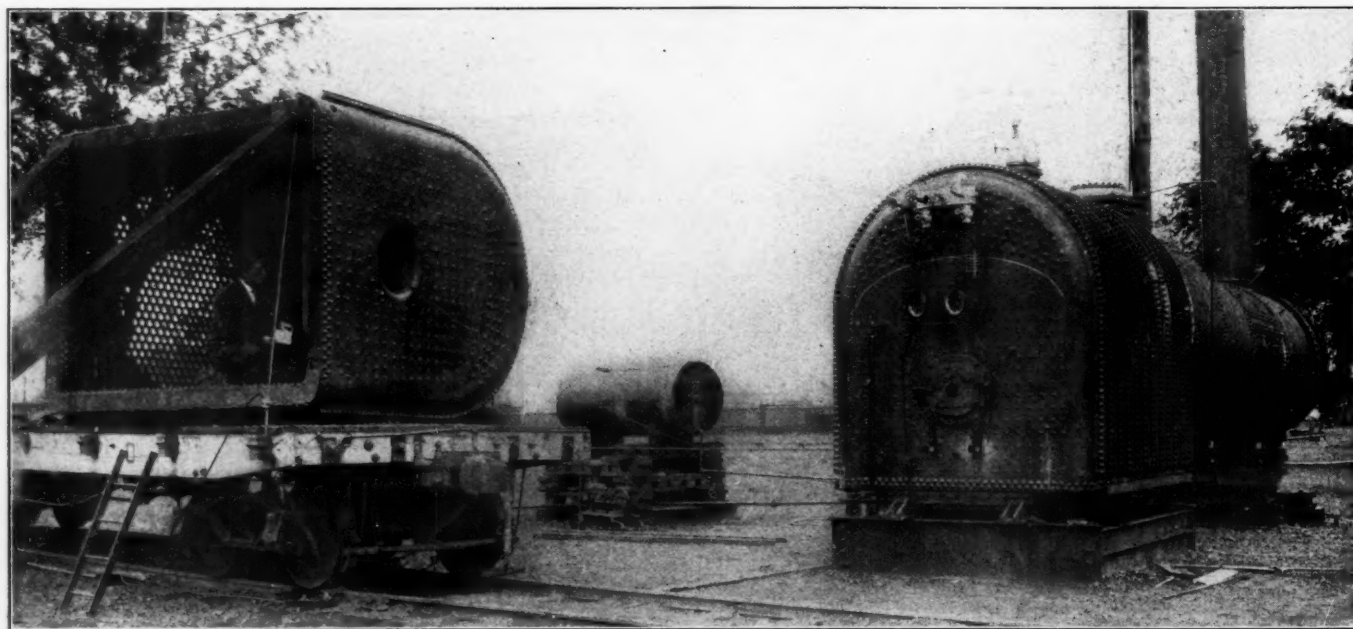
Boiler After the Test Showing Location of Fuel Oil Tank and Protection Shield.
